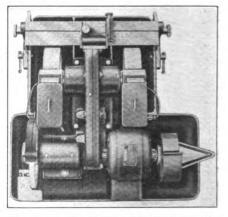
PLAN VIEW SHOWING THE ARRANGEMENT OF THE FOUR WHEELS
